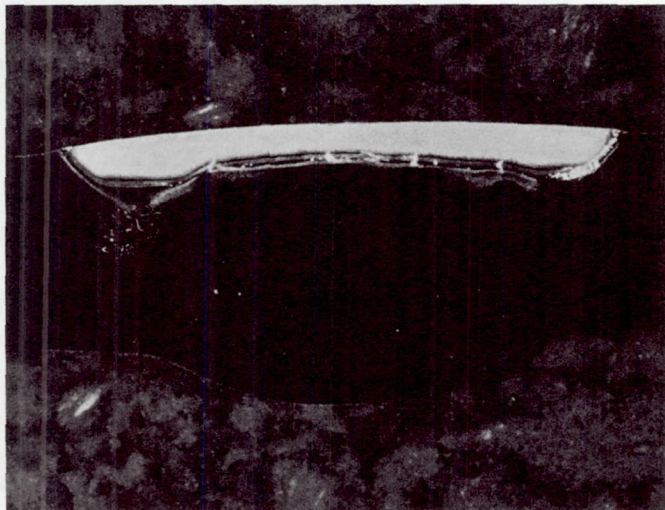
Structures of AZ92A wire/Al 2219-T87 plate, ac weld
